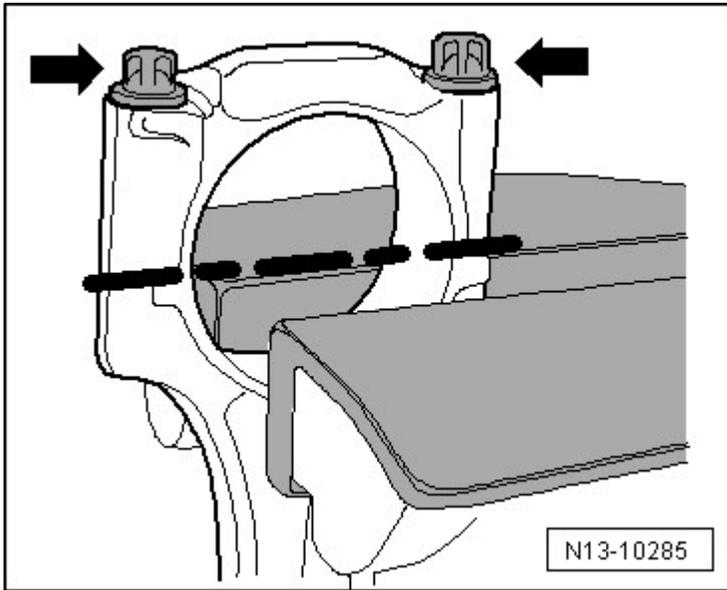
Clamping Connecting Rod In Vise Equipped With Aluminum Protective Pads
